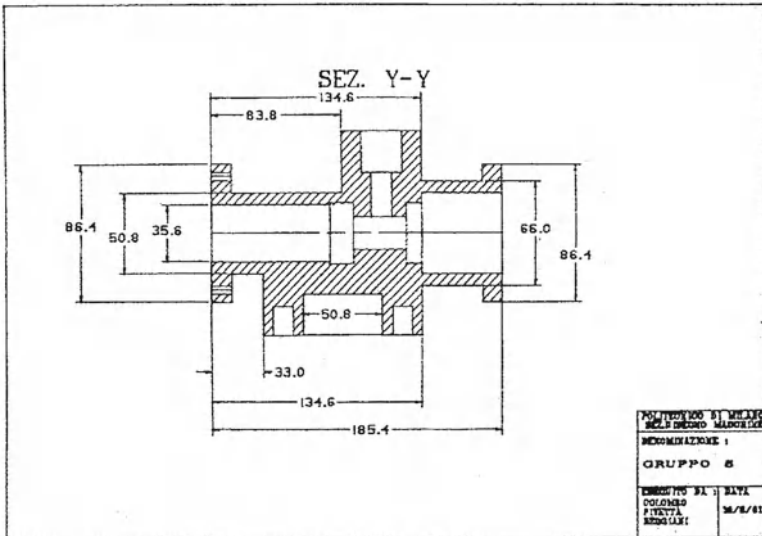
Drawing of mechanical parts (1981) (Rovida 1999)
